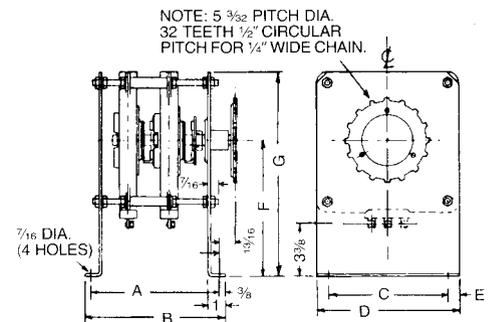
Dimensions of plate rheostat mounted with Catalog 9736330G1 floor support and sprocket wheel (7-in. handwheel is furnished for hand operation)
